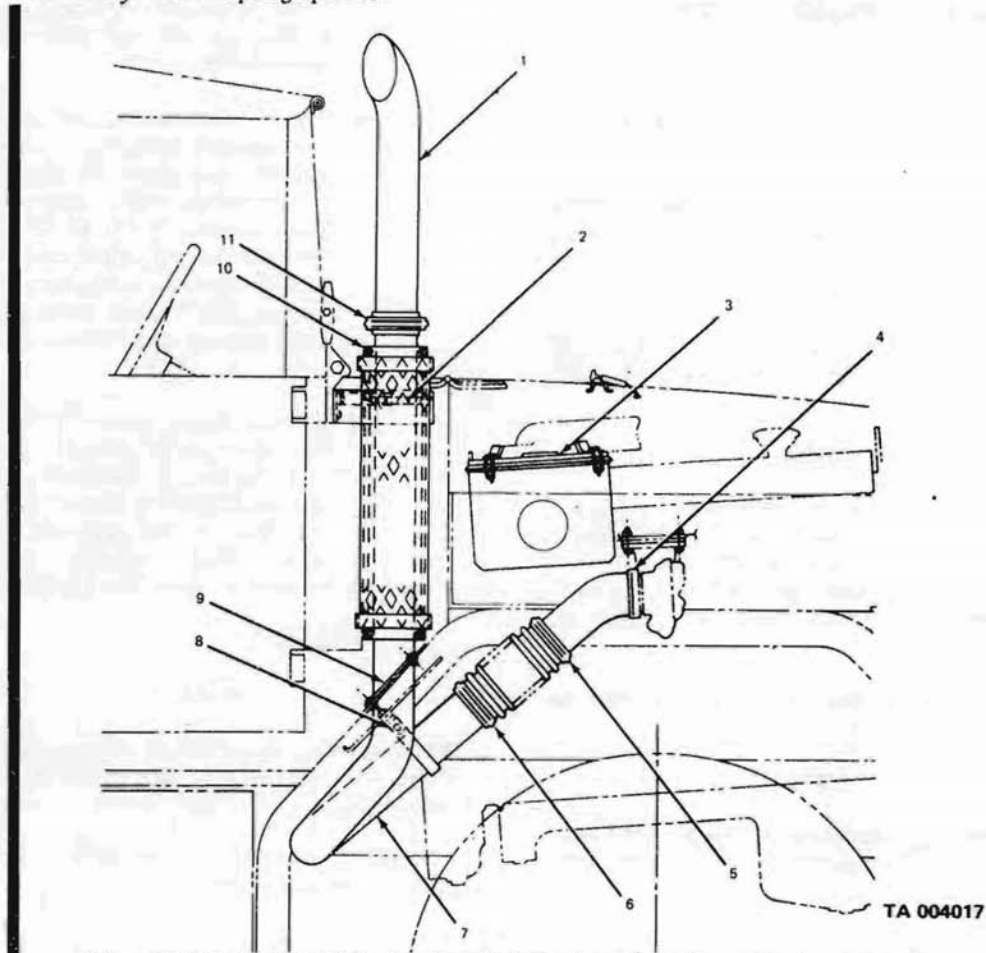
Vertical stack exhaust (clean air configuration engine) – removal
